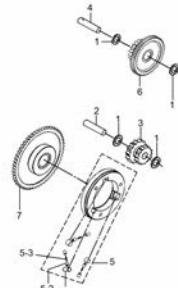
CAMSHAFT-VALVE (P03-S070-0022)
